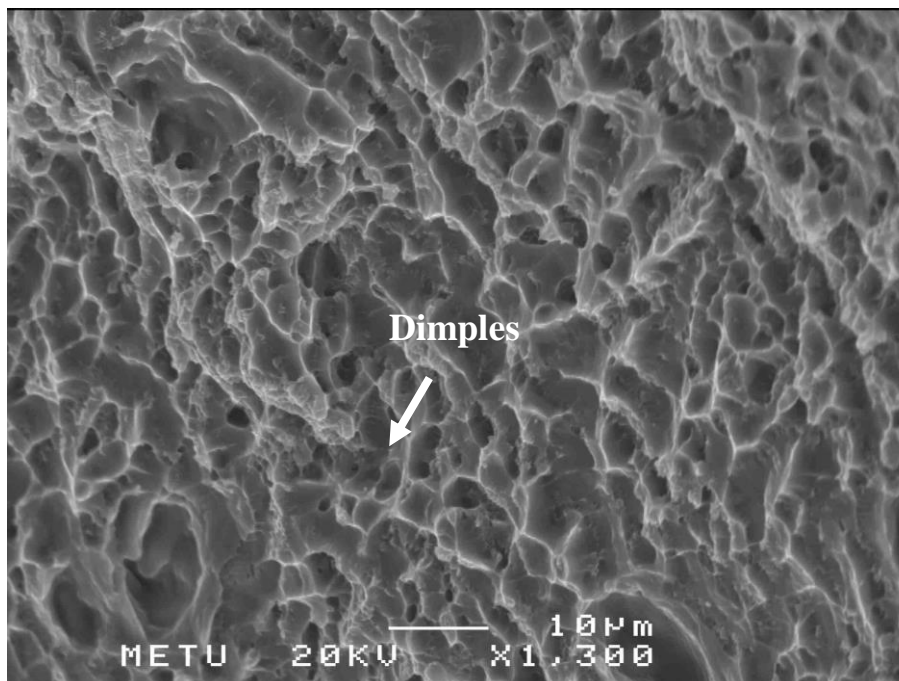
45V.1. The section from the fracture surface (edge-fusion line). Keller's reagent.
